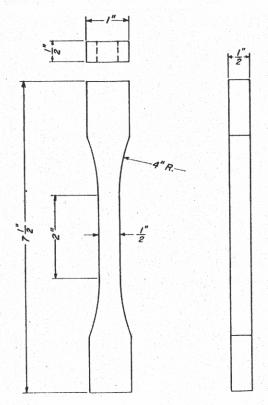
Sketch of tension-perpendicular (D) specimen.
